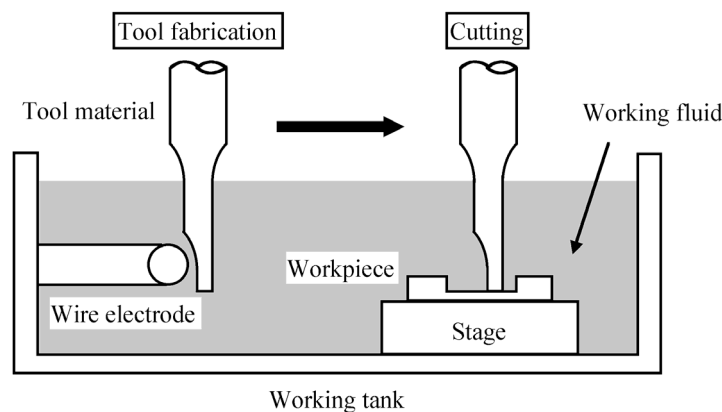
Microtool fabrication using WEDG and cutting with the fabricated tool
